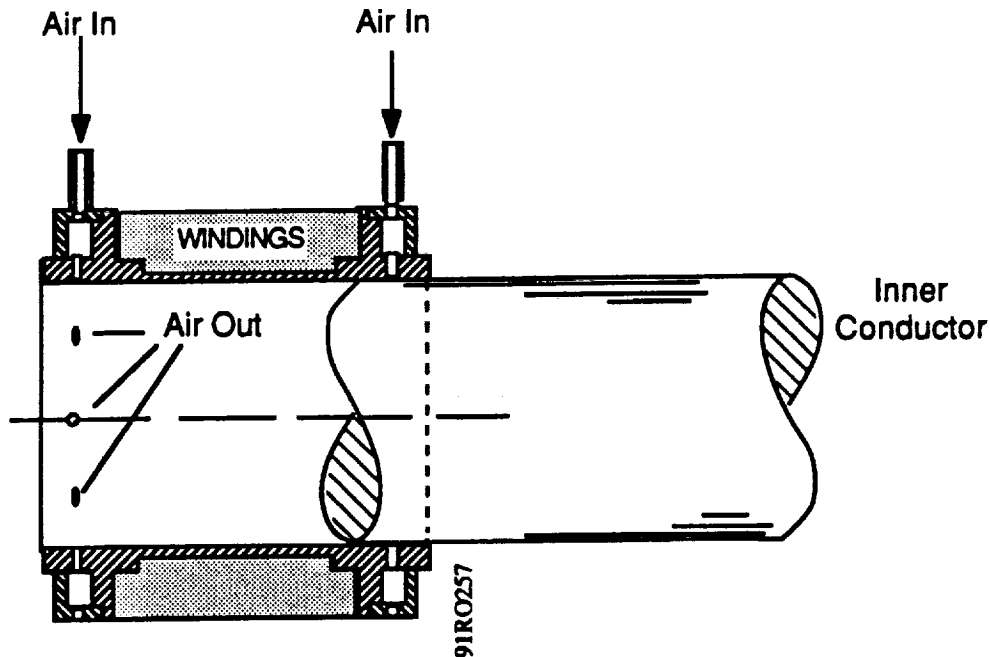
Moving Actuator Coil Spool Employing Integral Air Bearing
